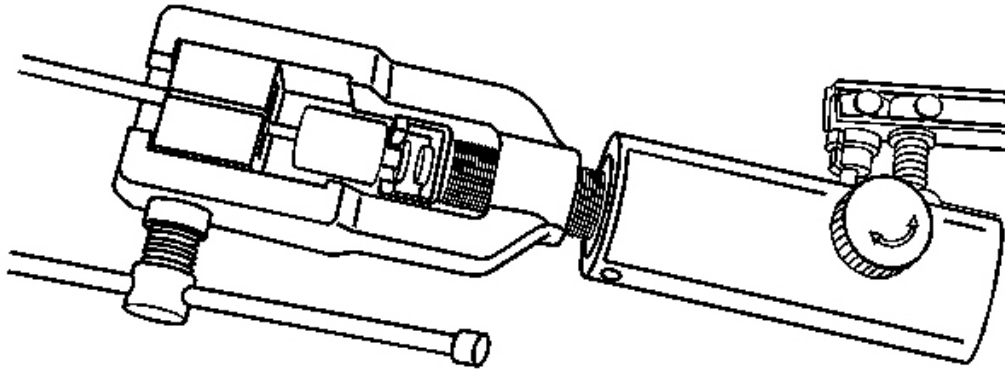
Rotating J 45405 To Bottom Against Die Cage
